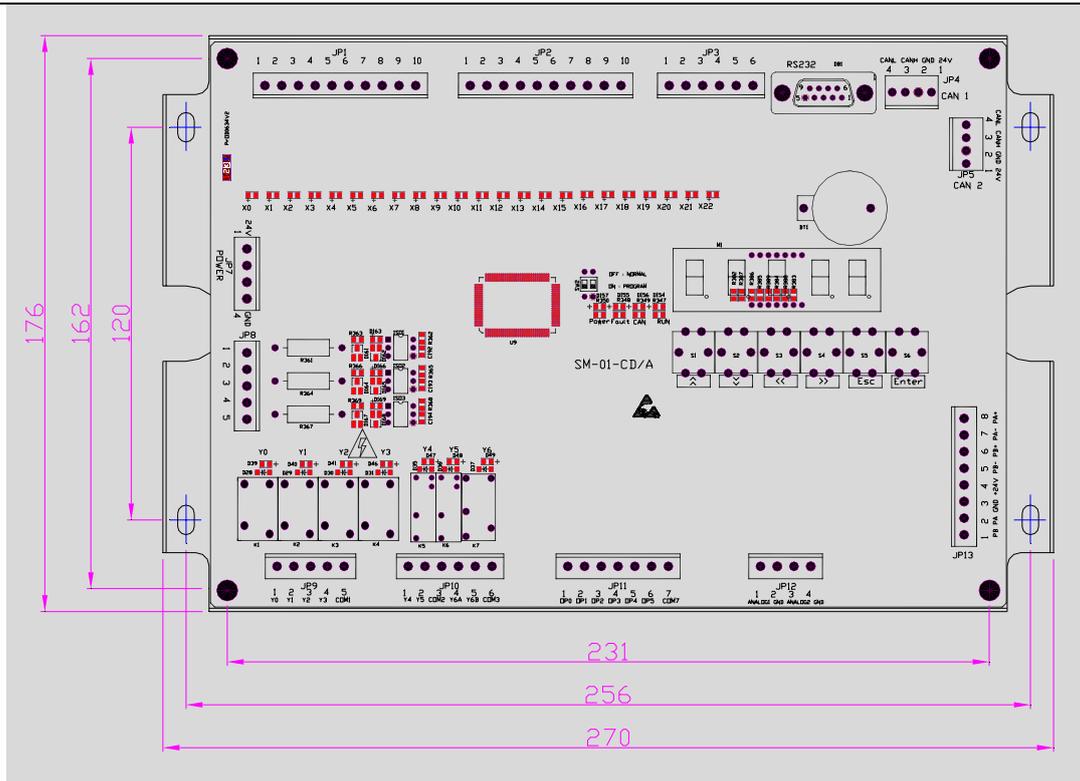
(B) Mounting Dimensions of Master Control Board
